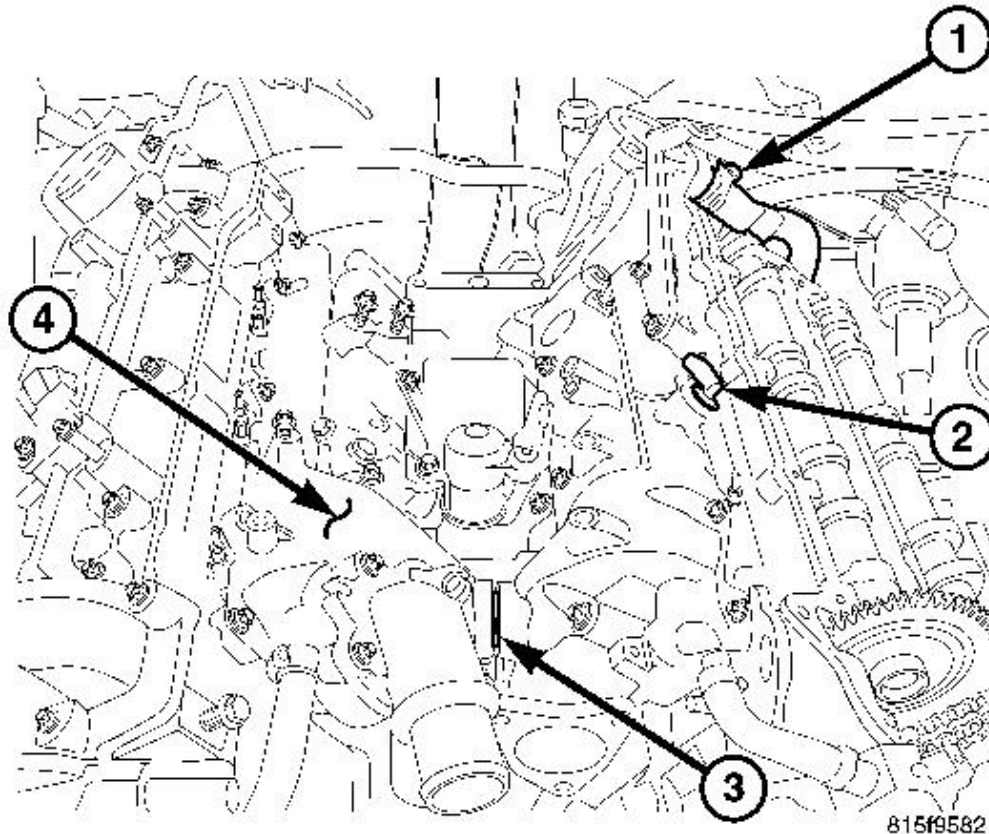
EGR Coolant Pipe, Coolant Temperature Sensor, Intake Coolant Passage & Intake Manifold
